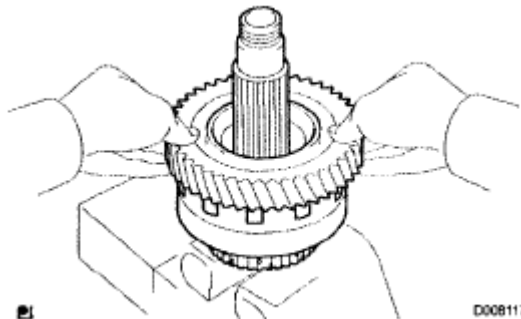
Identifying Counter Driven Gear With Planetary Ring Gear
